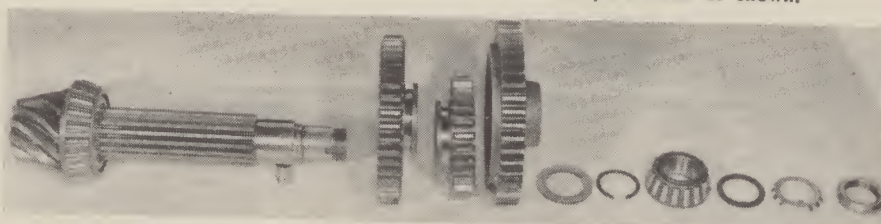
Correct arrangement of components of bevel pinion shaft for 6 speed transmission.
